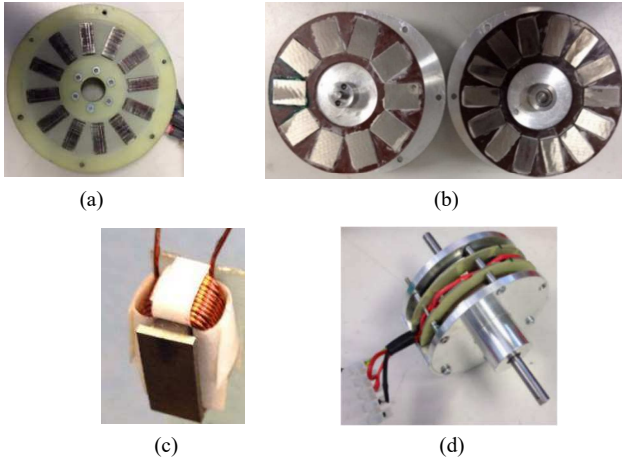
The machine prototype. (a) Stator, (b) Rotors (c) Stator pole. (d) The assembled machine prototype.
